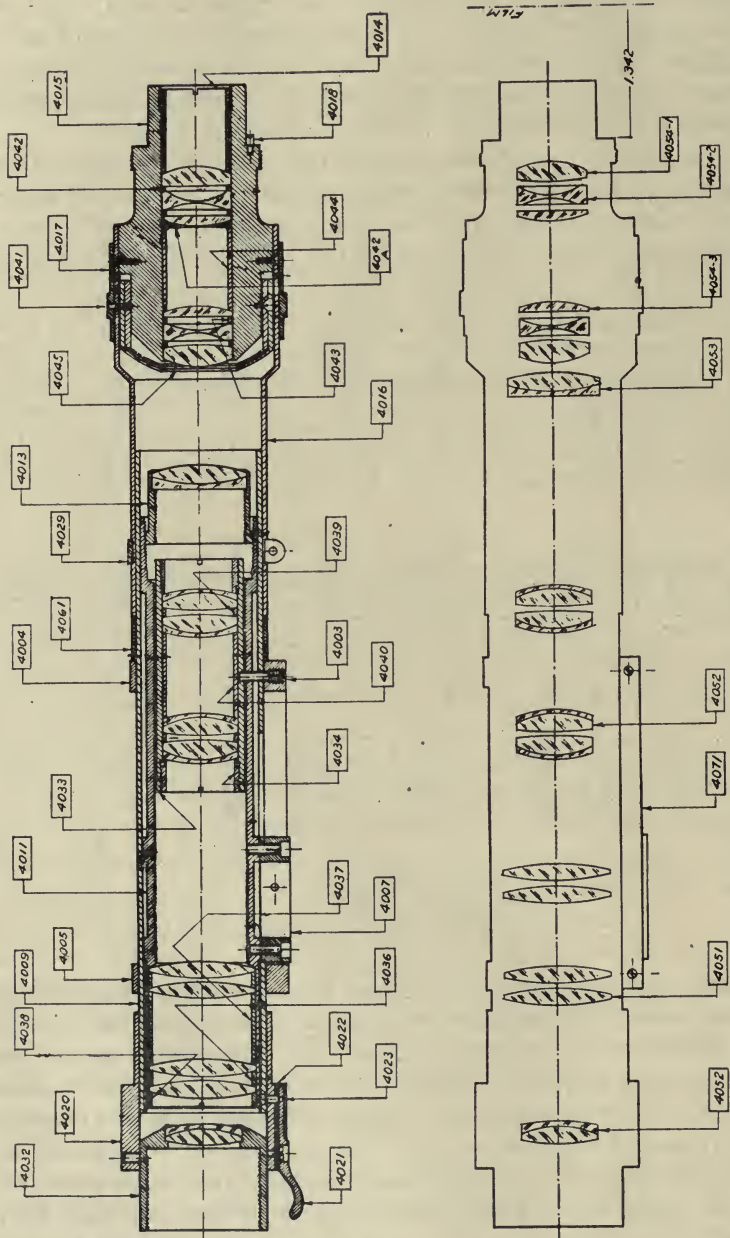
Cross section of Zoomar lens: top, wide-angle position; bottom, tele-photo position.
